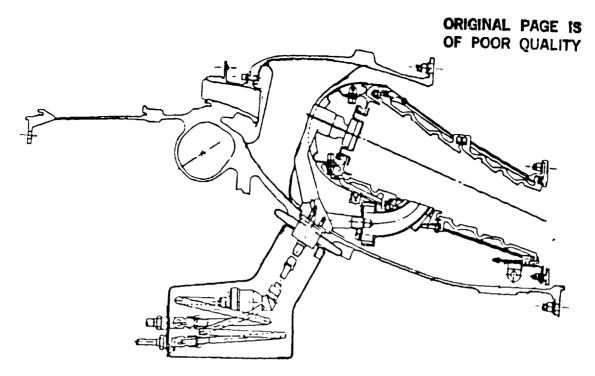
Rig Diffuser and Combustor Section Hardware Utilized in Integrated Core/Low Spool Experimental Engine
